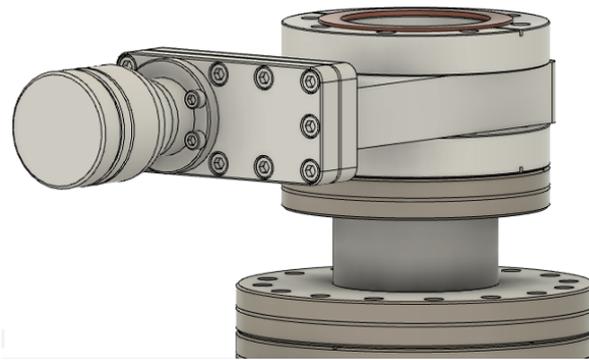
CAD-view of the slider and extension flange. [41] [48]
